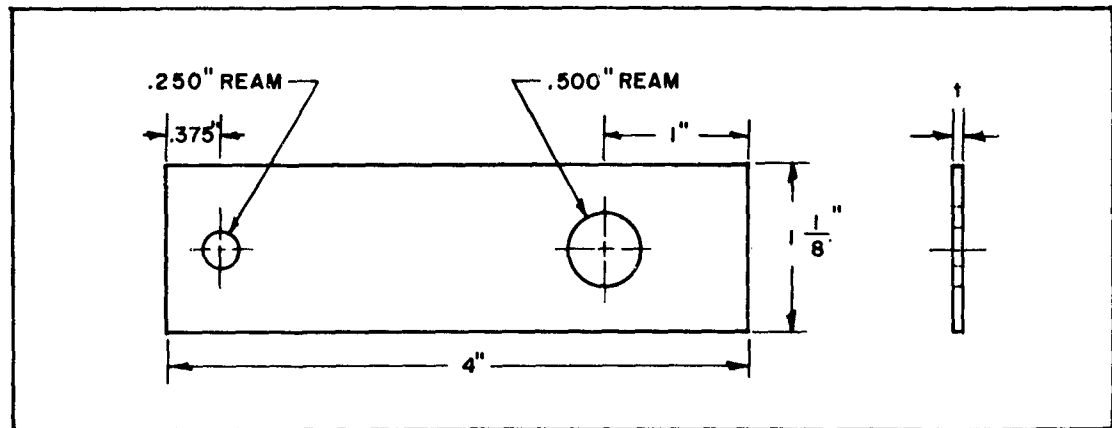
Sheet Bearing Test, Specimen-Bearing Ratio $e/D = 1.5$
